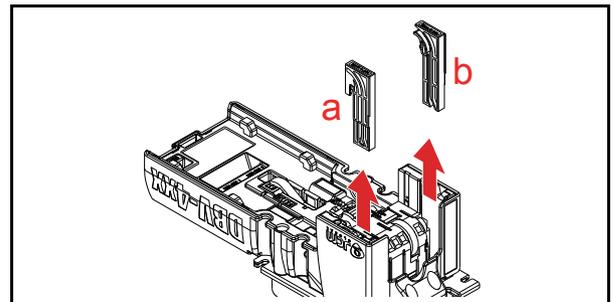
Placing KS-095A Reference Paper 1 (Rear-Access Cash Box)
